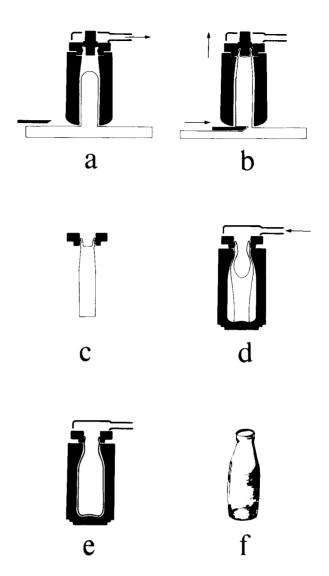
Mechanical forming of glass containers: the Owens suction-and-blow process. (a) The gob is sucked up into the blank mould. (b) The neck of the container is formed and the glass gob sheared off at the base. (c) The blank or parison shape with the ring mould still attached. (d) The blank shape is transferred to a full-sized mould and blowing begins. (e) The container's final shape is blown. (f) A finished bottle.
